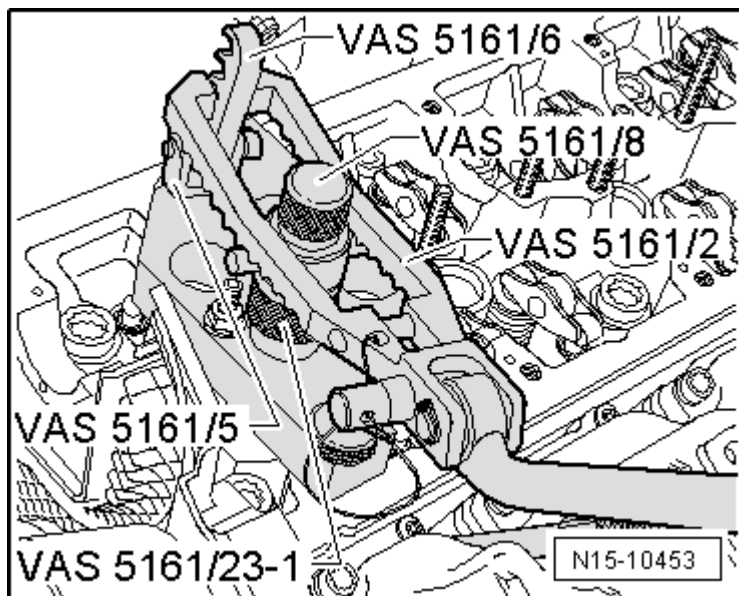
Identifying Assembly Cartridges VAS 5161/2, Valve Insertion Device VAS 5161/8 And Guide Plate VAS 5161/23
